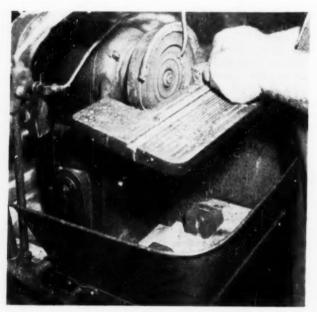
GRINDING CARBIDE-TIPPED LATHE TOOL
